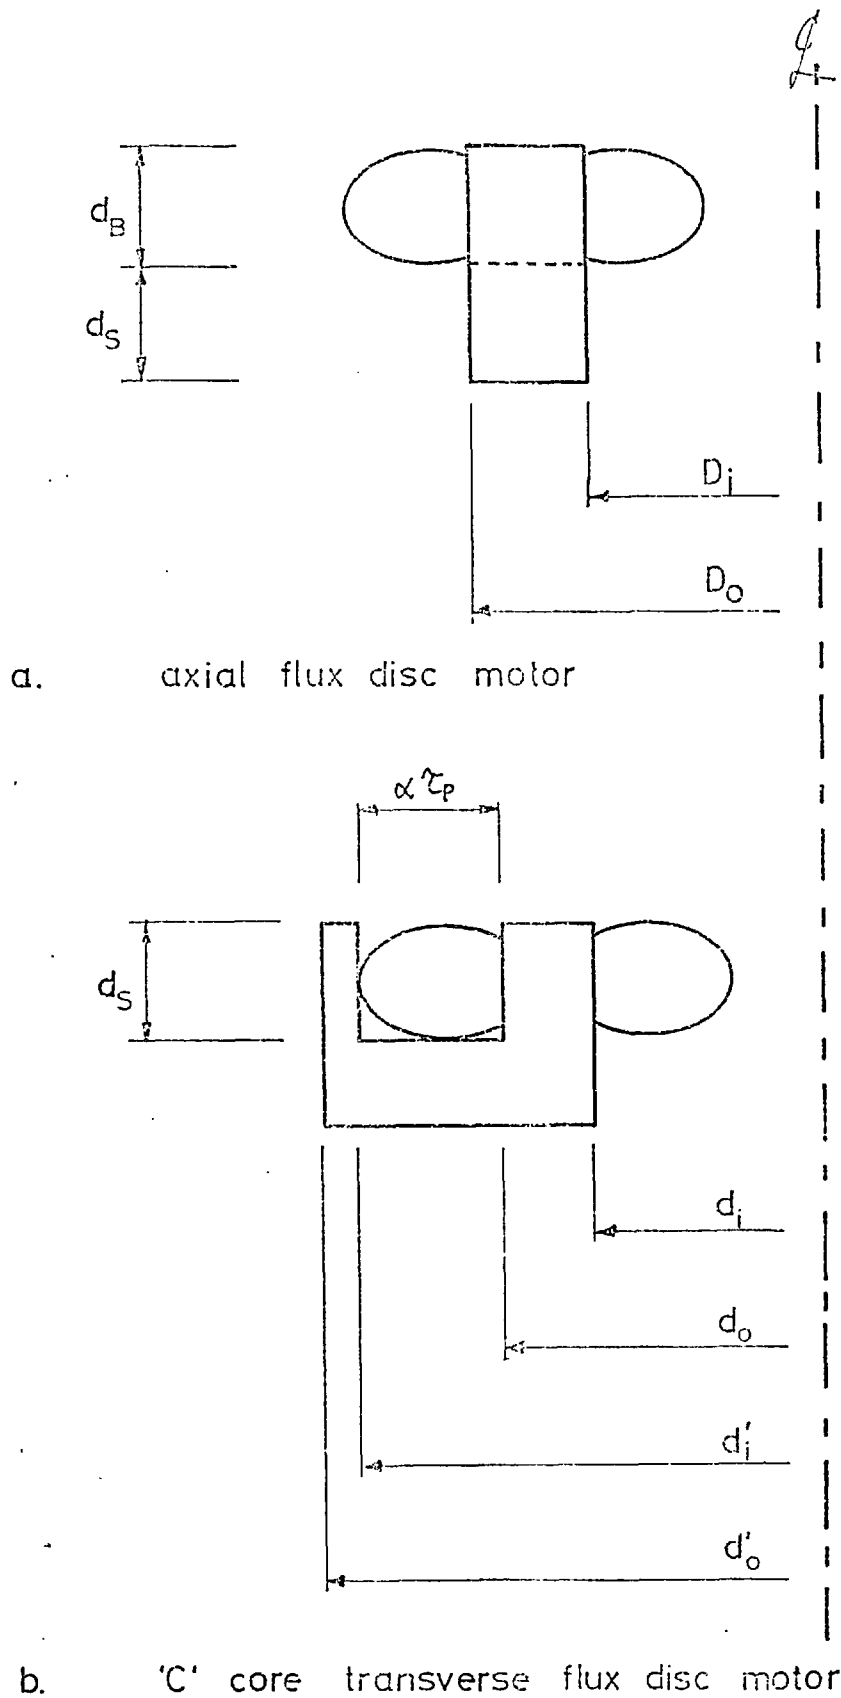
DIMENSIONS FOR EQUIVALENT AXIAL FLUX- AND 'C' CORE TRANSVERSE FLUX- DISC MACHINES
